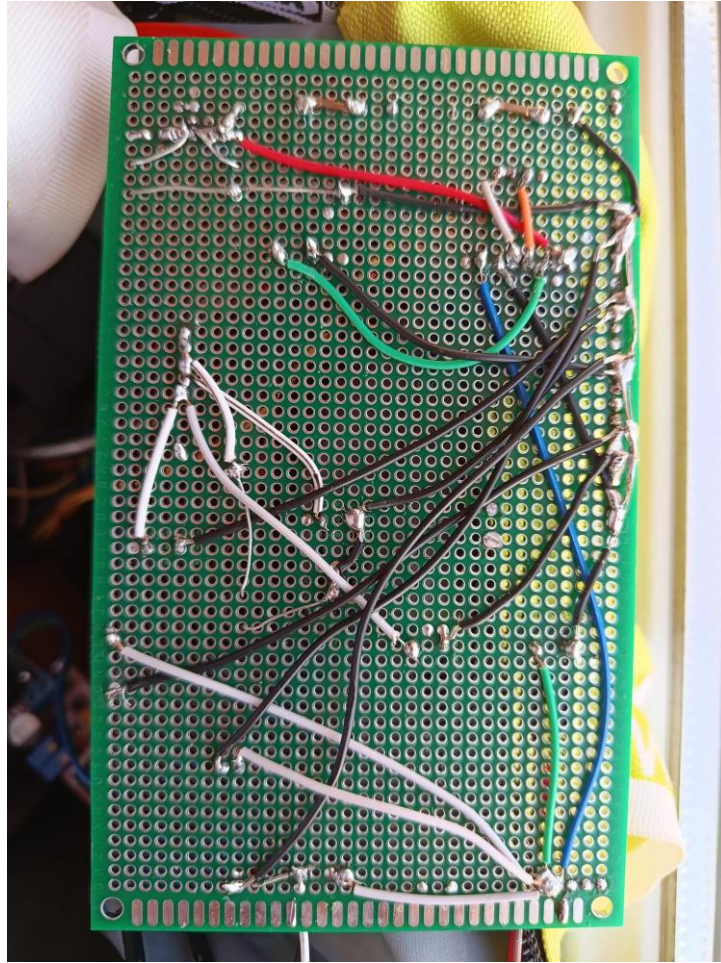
Board 1 (9×15 cm) — power stage assembly
